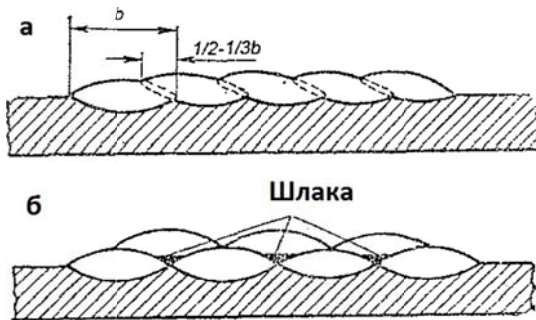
Technique of surface-welding, used for recovery of a toothed gear
